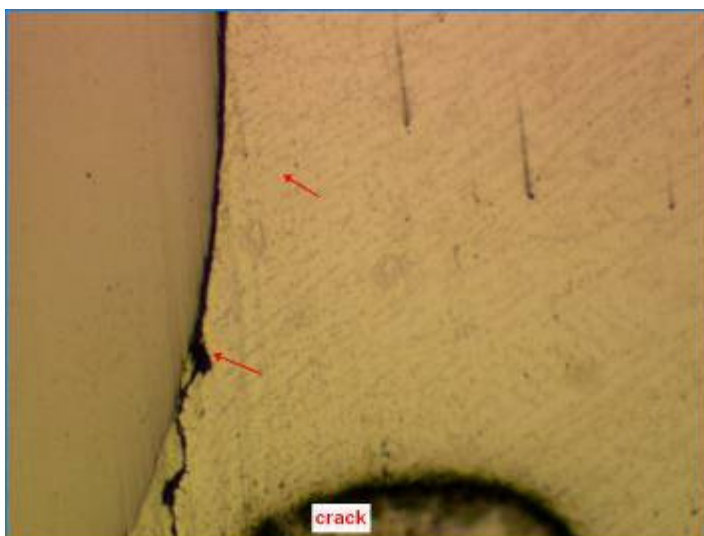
cross section, SN62, U61, left lead solder crack, 400x c
